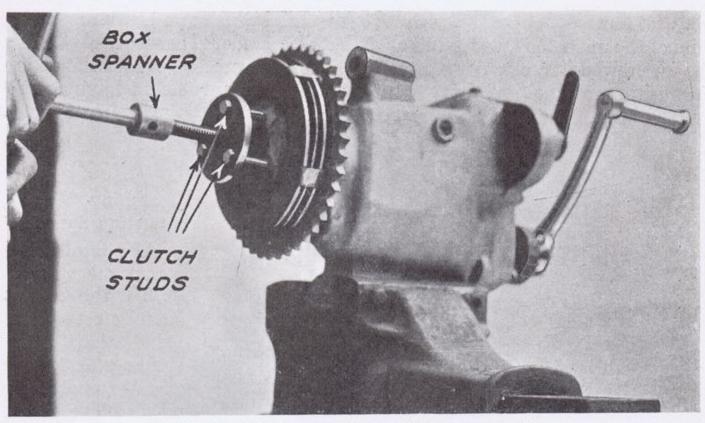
USING THE CLUTCH WITHDRAWAL TOOL.
